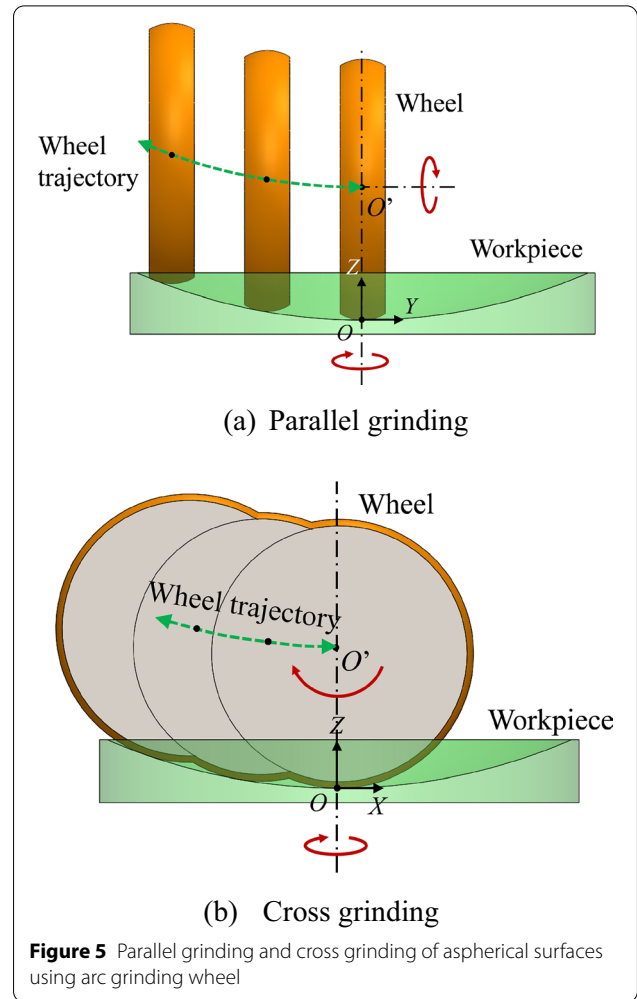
Parallel grinding and cross grinding of aspherical surfaces using arc grinding wheel
